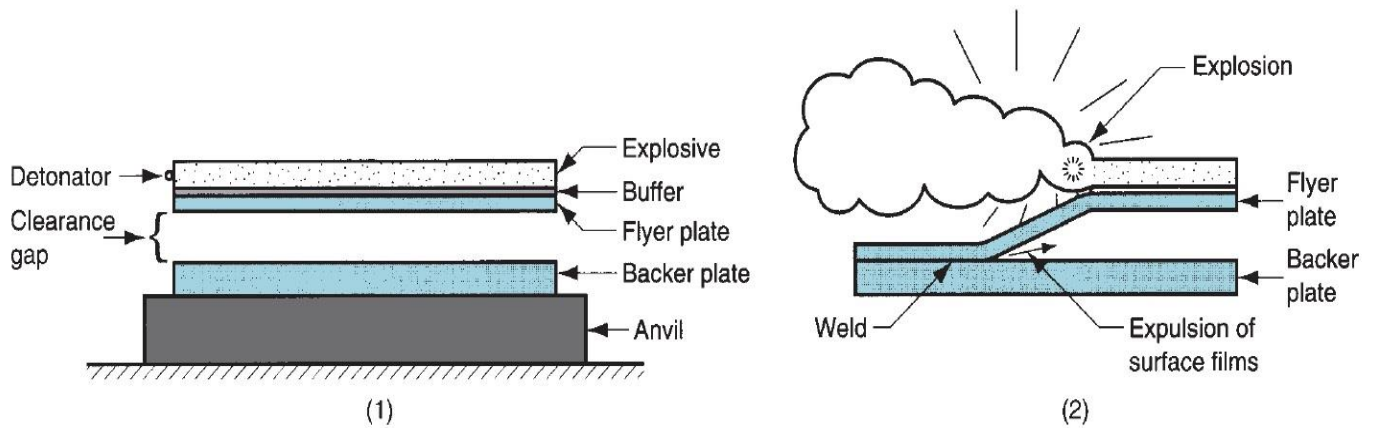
Explosive welding (EXW): (1) setup in the parallel configuration, and (2) during detonation of the explosive charge.
